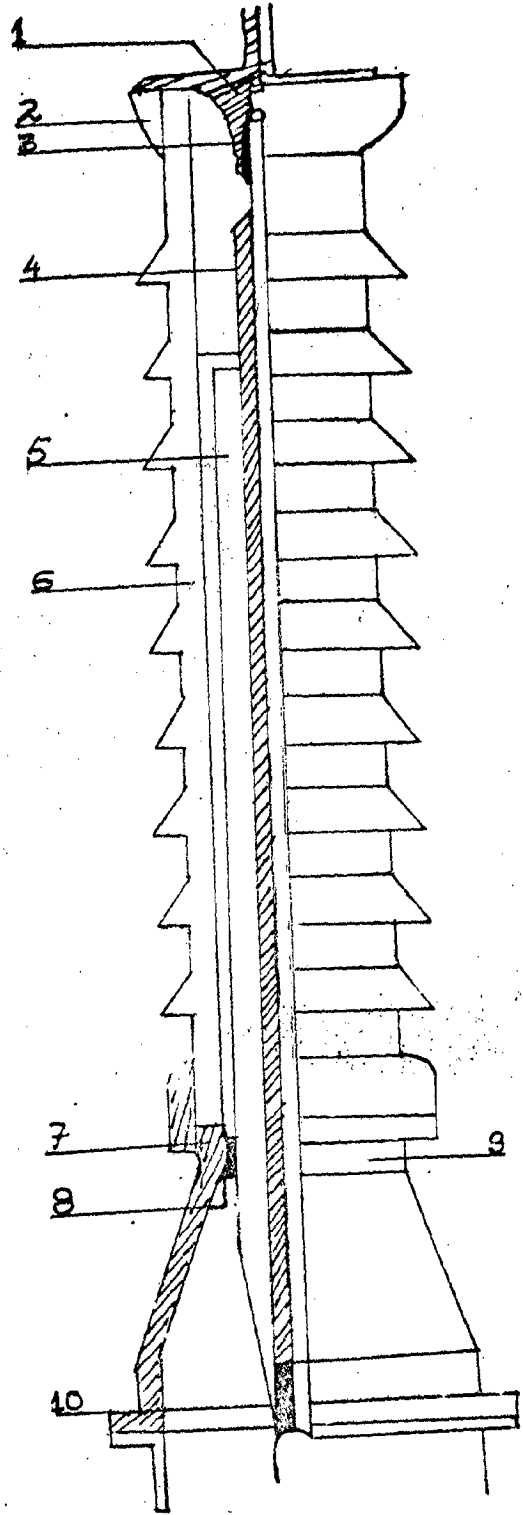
Sectional View of a SF6 Outdoor Bushing.
